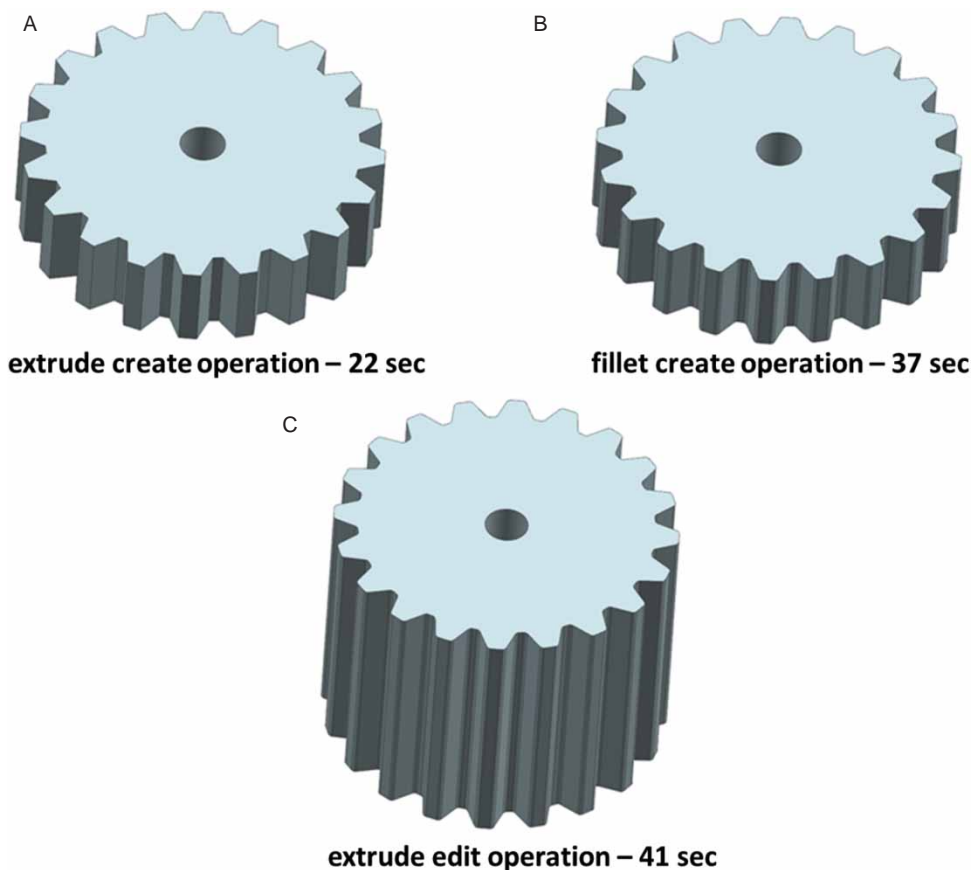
A: Gear extrusion; B: Fillets added to gear sides, C: Thickened extrusion.
